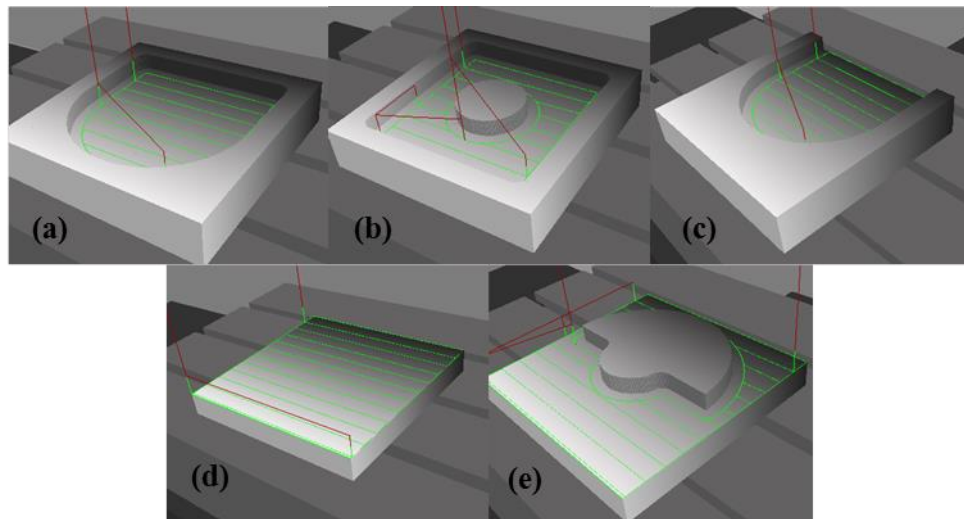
(a)-Closed Pocket Machining, (b)-Closed Pocket with Island Machining, (c)- Open Pocket with Bounds Machining, (d)-Completely Open Pocket Machining, (e)-Open Pocket with Island Machining [257]
